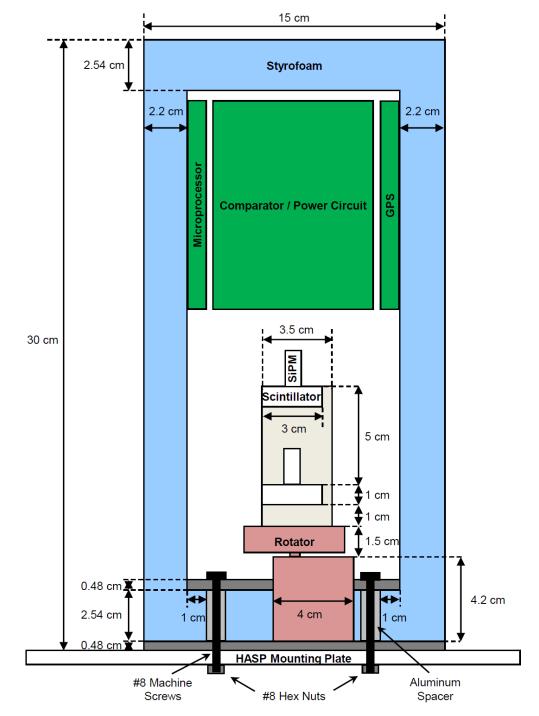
Similar to Figure 2, except the payload is viewed from the side. Again, the screws to secure the rotator motor to the bottom aluminum plate have been omitted.
